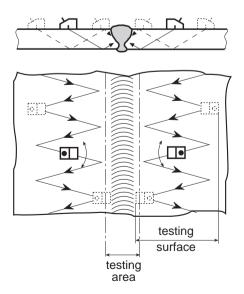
Testing for longitudinal defects in butt welds
